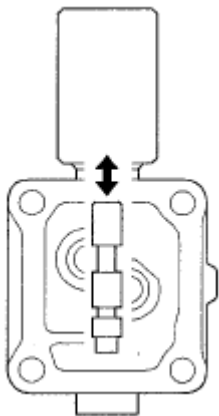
Identifying A/T Clutch Pressure Control Solenoid Valve C
